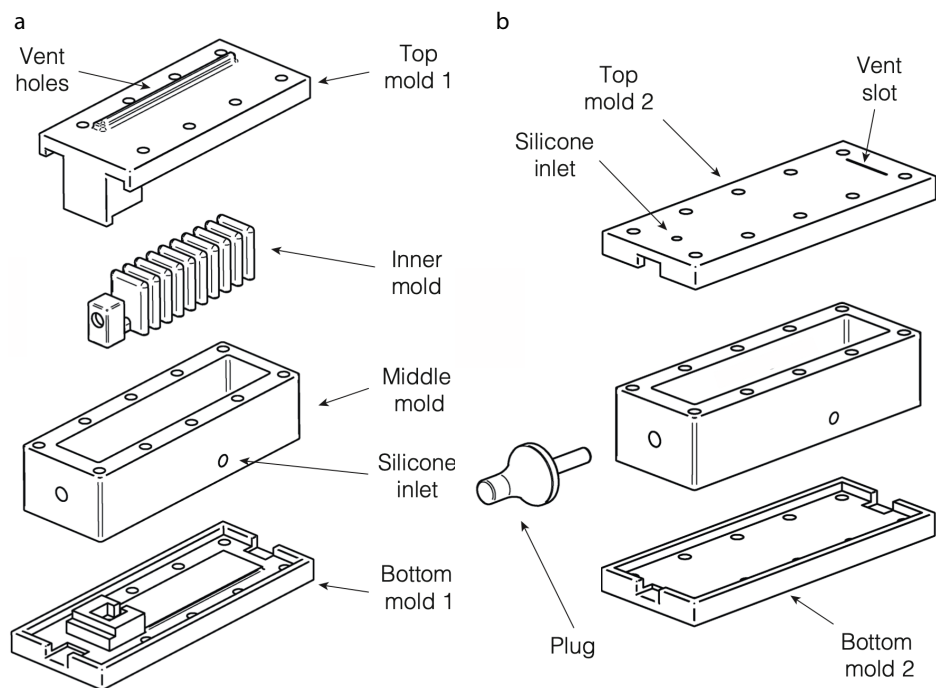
Two-steps procedure fabrication of the soft bending actuators. (a) In the first step we insert the inner mold on Bottom mold 1 and inject DS 20 from the silicone inlet. (b) After waiting 2.5h, we substitute Top Mold 1 and Bottom Mold 1 with Top Mold 2 and Bottom Mold 2 respectively, before inserting the Plug and injecting ED 32.
